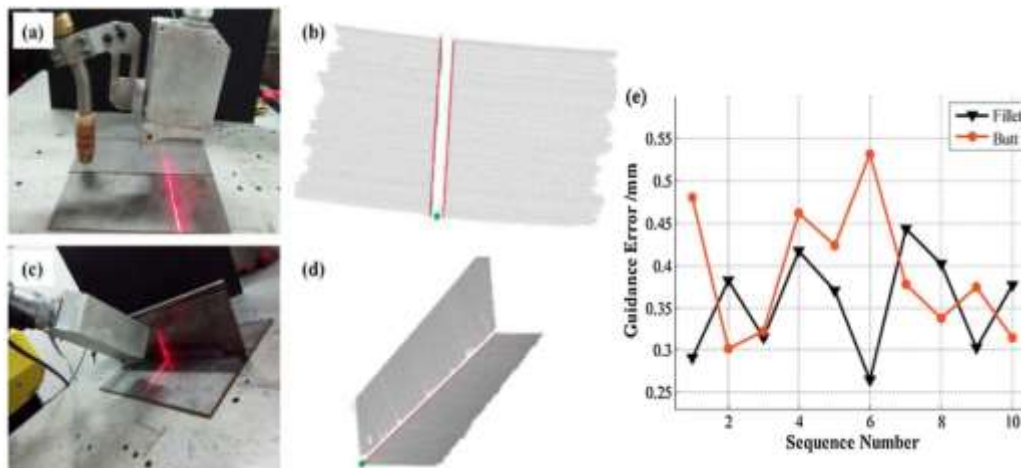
Ten sets of SWP guidance test: (a) butt weld seam, (b) SWP extraction in butt weld seam, (c) fillet weld seam, (d) SWP extraction in fillet weld seam, (e) guidance error. [16]
